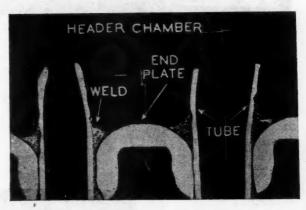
Section through end plate and two tubes of Ju 88 radiator (Type A)
